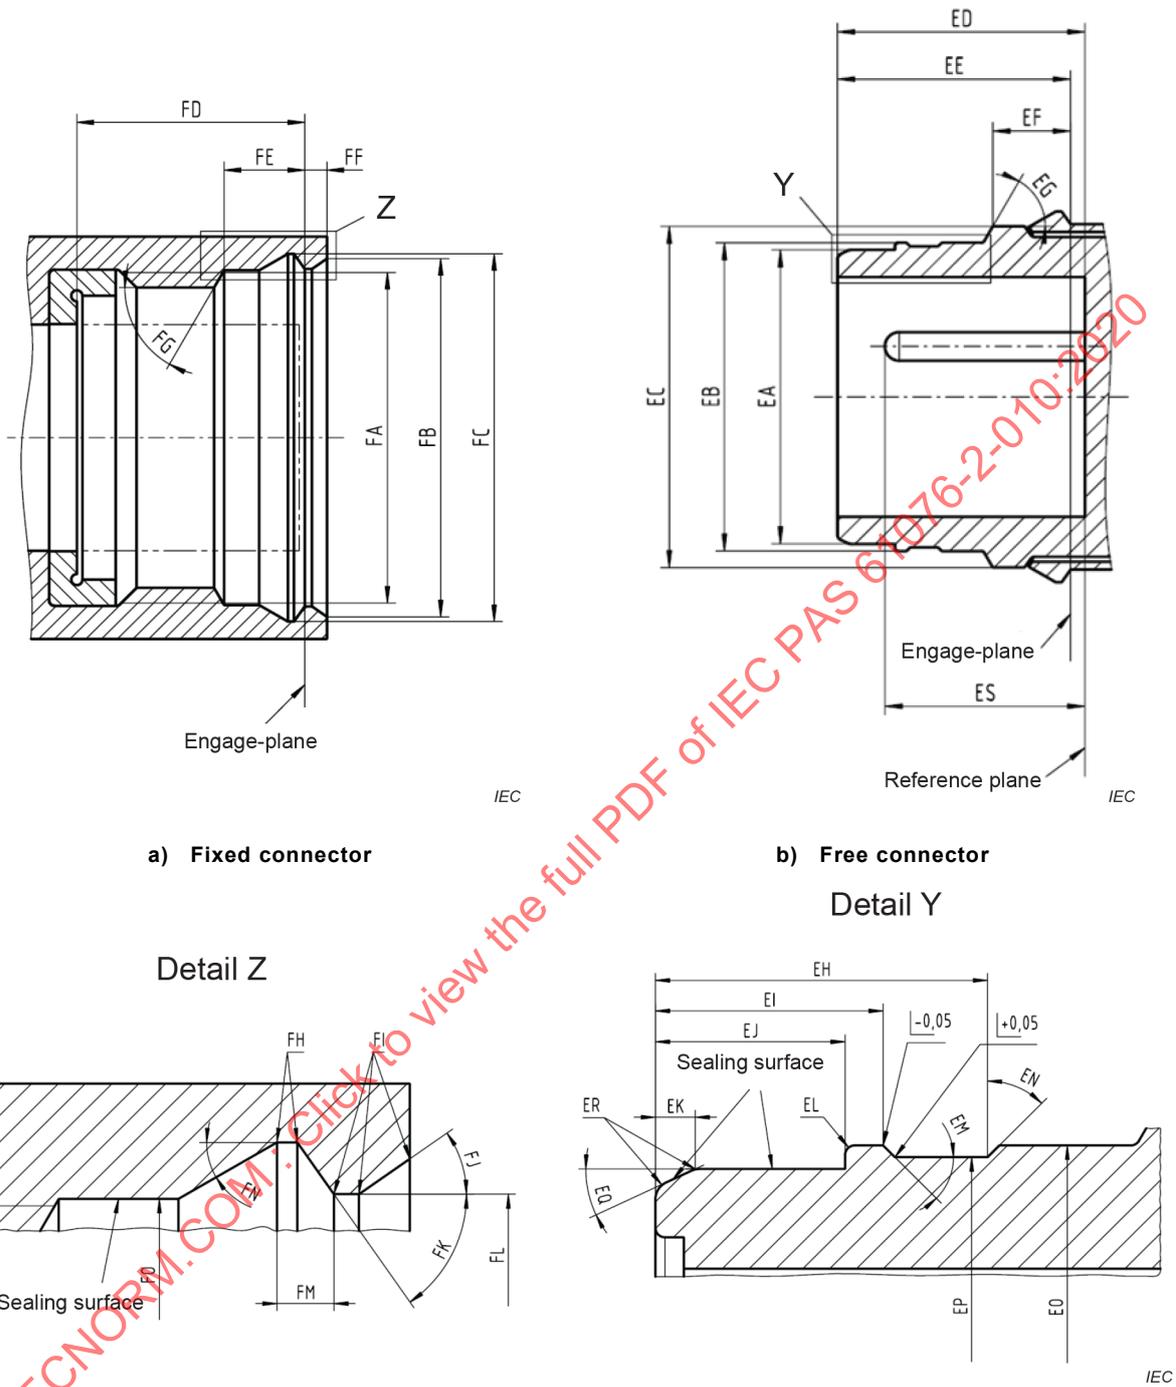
Inner push-pull-locking: female fixed connector side view and male free connector side view with details for both
